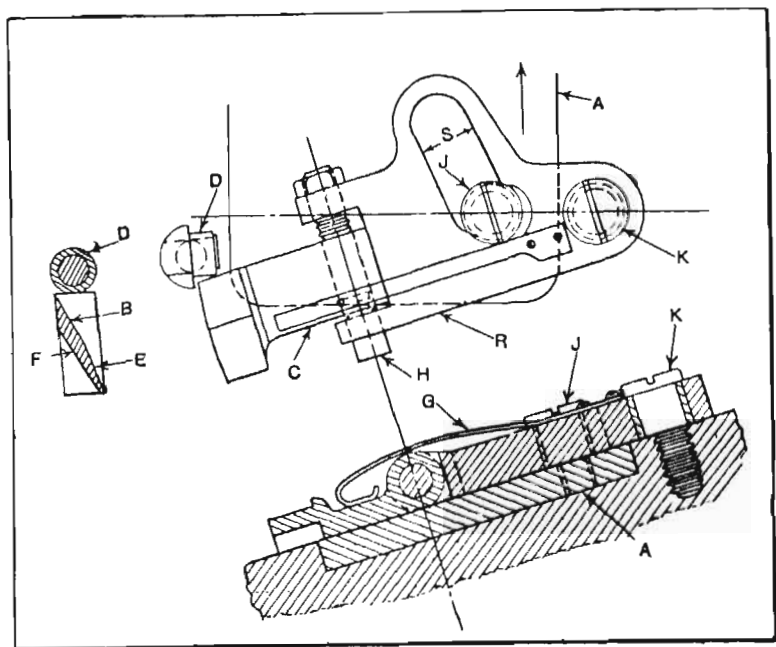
Mechanism for Operating the Pin that Locks Table of Fixture During Machining Operation
